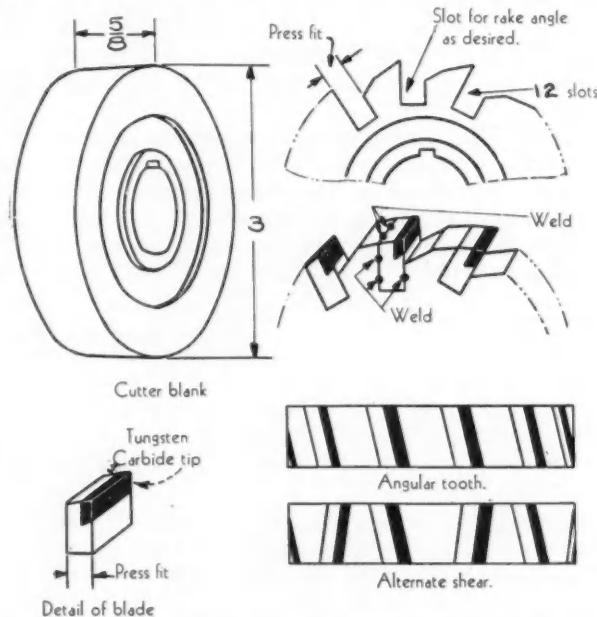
MILLING CUTTER HAVING TUNGSTEN-CARBIDE-TIPPED BLADES TACK-WELDED IN PLACE
